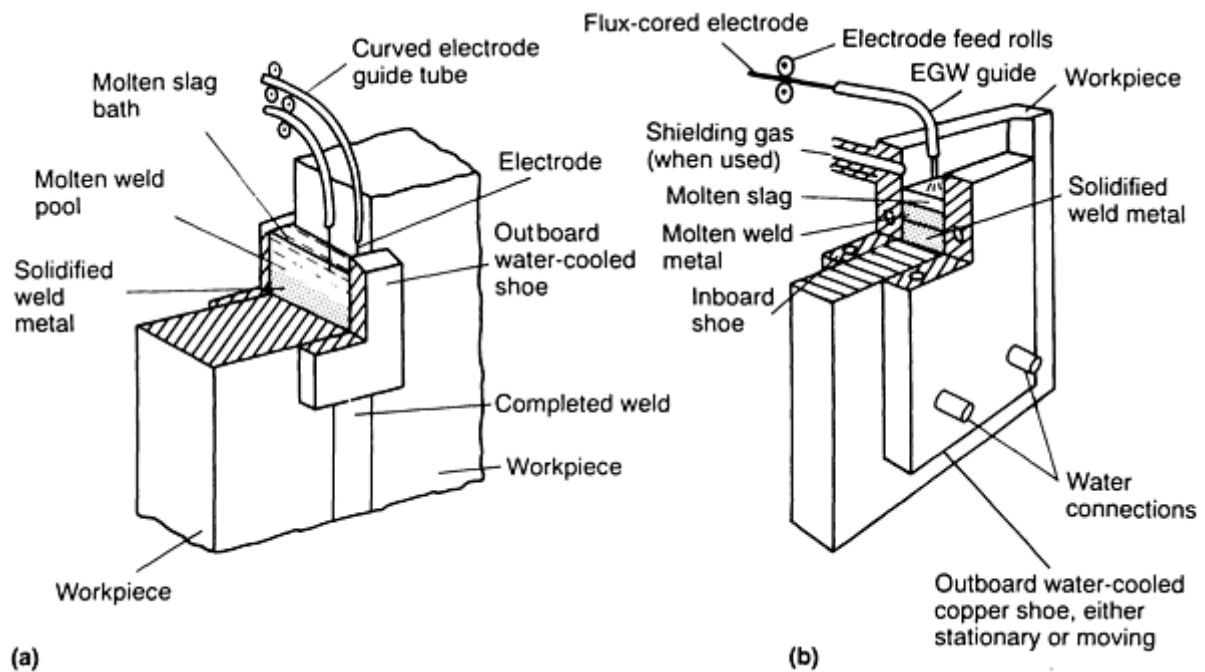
SCHEMATICS COMPARING PRIMARY COMPONENTS OF TWO VERTICAL WELDING PROCESSES IN WHICH MOLTEN WELD POOLS ARE CONFINED BY COOLING SHOES. (A) ELECTROSLAG WELDING. (B) ELECTROGAS WELDING
